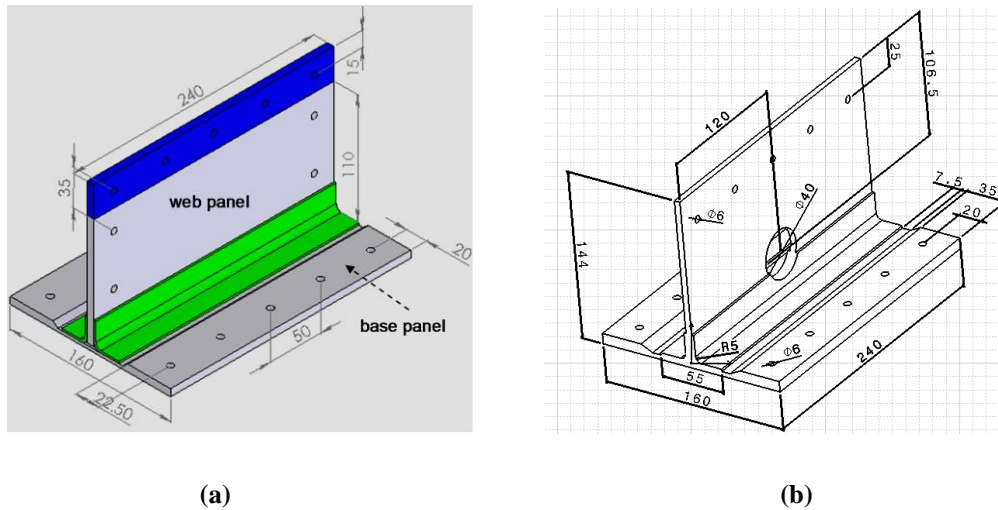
Sandwich T-joint geometry details: (a) Without cutout; (b) With cutout
